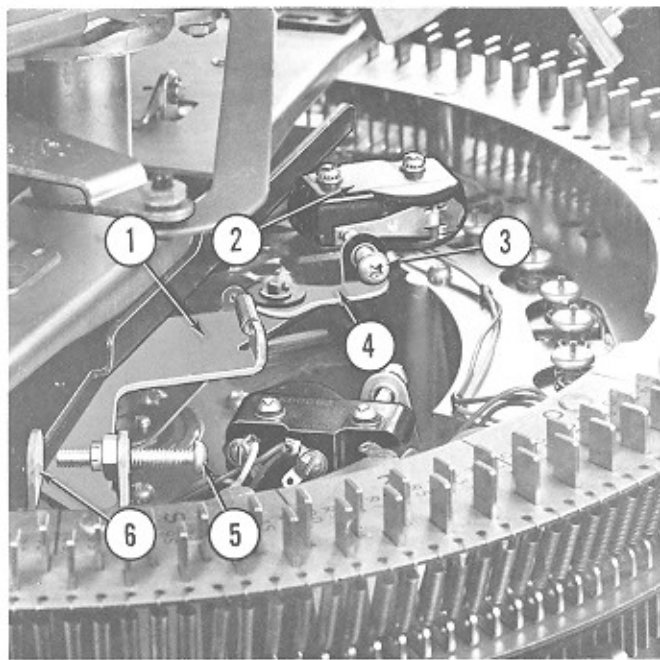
ACTUATING SCREW ADJUSTMENT, CARRIAGE SWITCH
